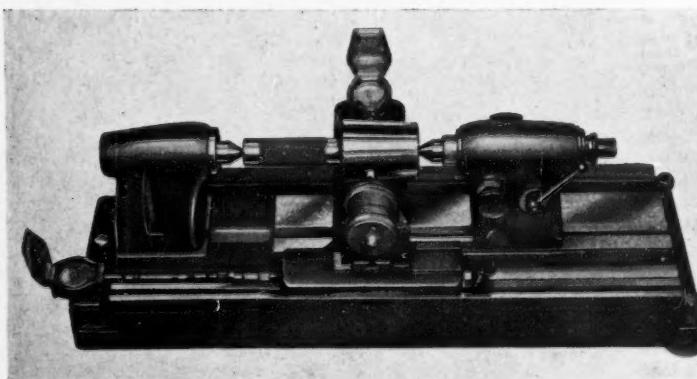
Tandee Taper Measuring Machine and Linear Dimension Gauge
